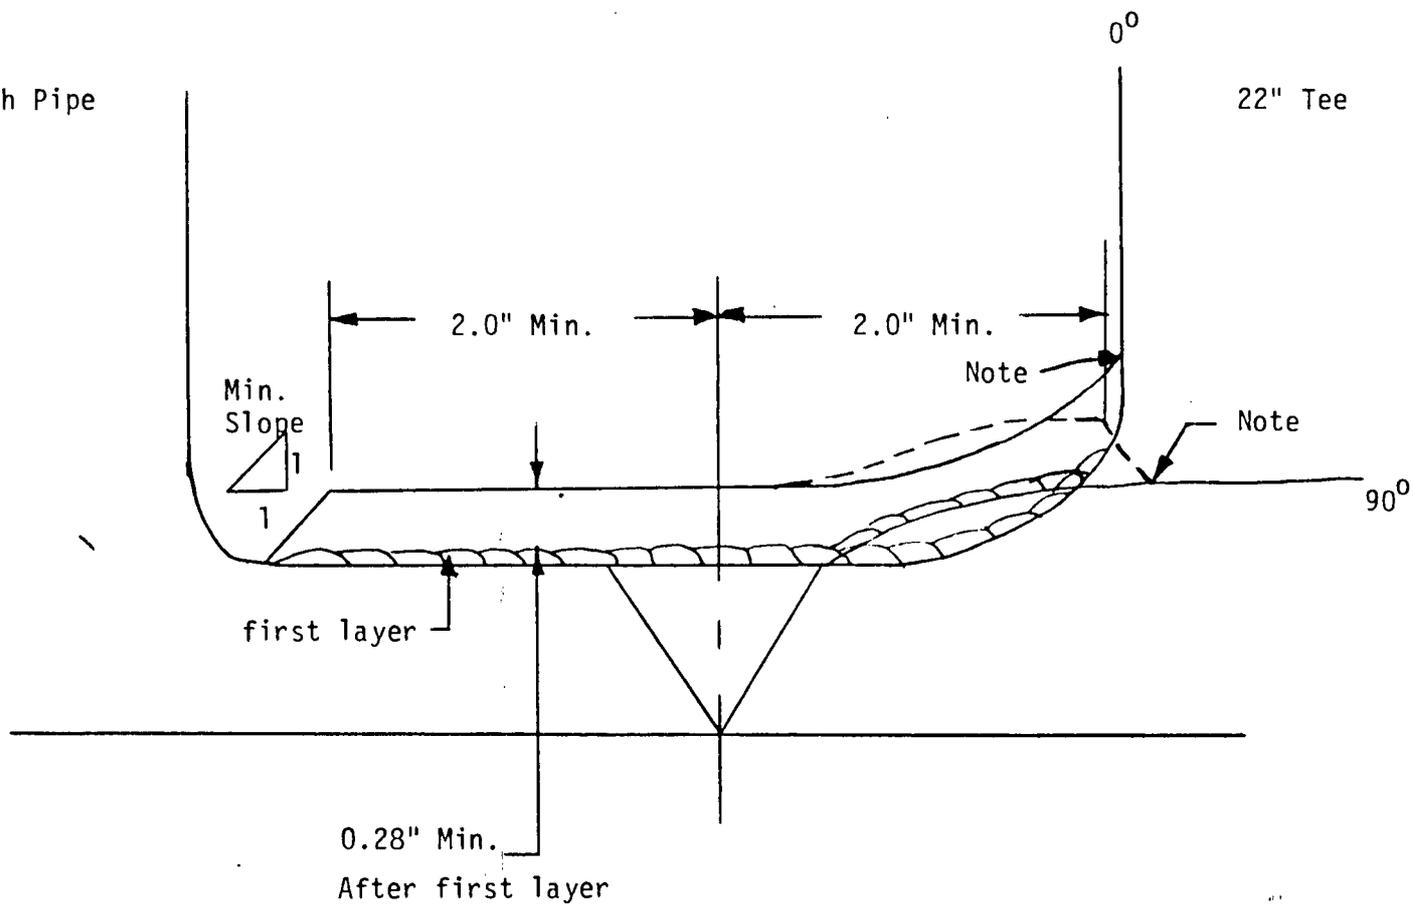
WELD OVERLAY DESIGN FOR WELD RHB-J1
